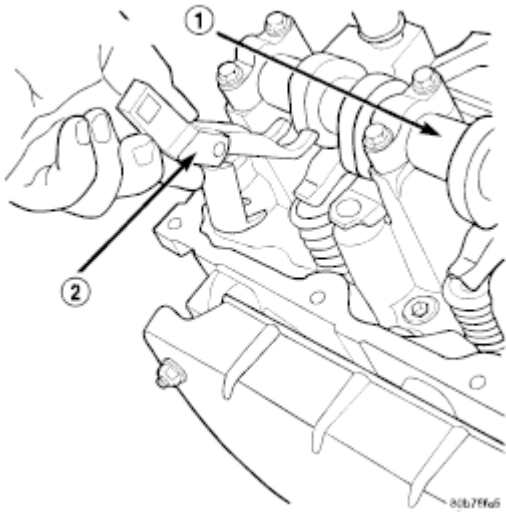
Identifying Rocker Arm And Valve Spring Compressor
